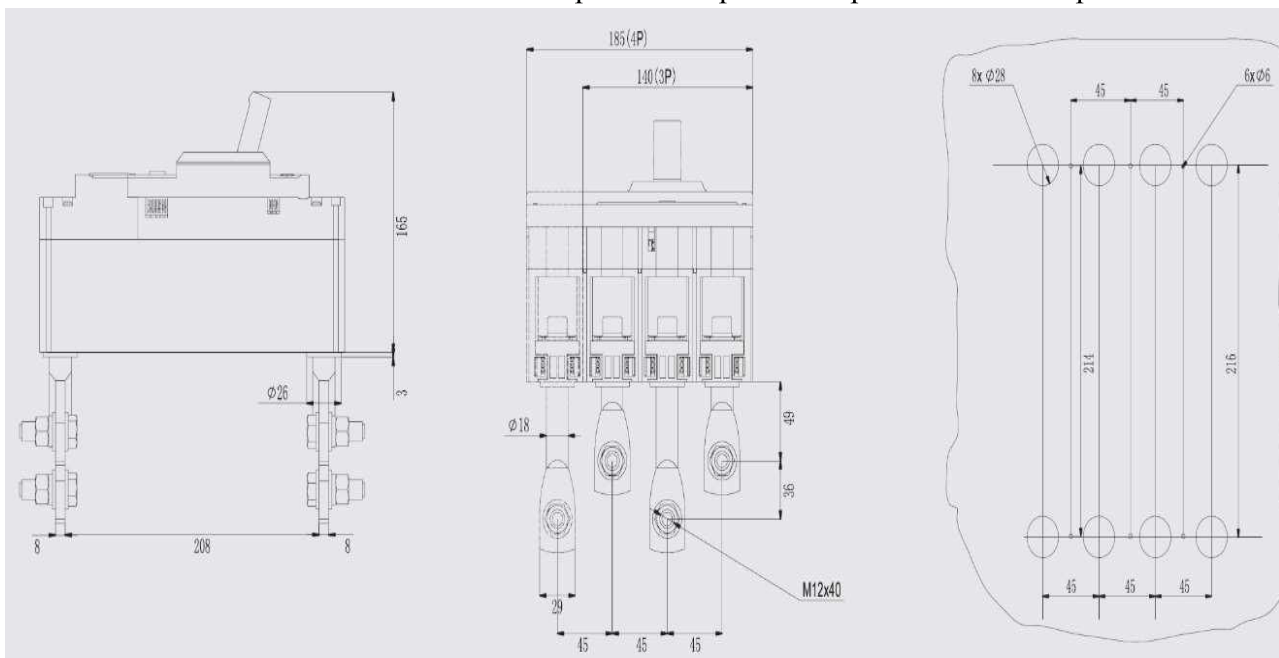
outline dimensions of 3-pole and 4-pole back panel connection products
